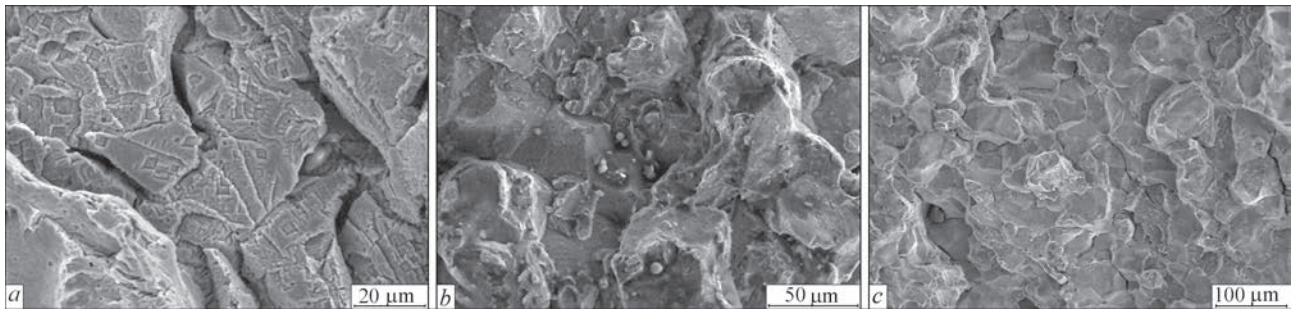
Fracture mode: *a* — facing weld; *b* — root weld; *c* — near-weld zone
